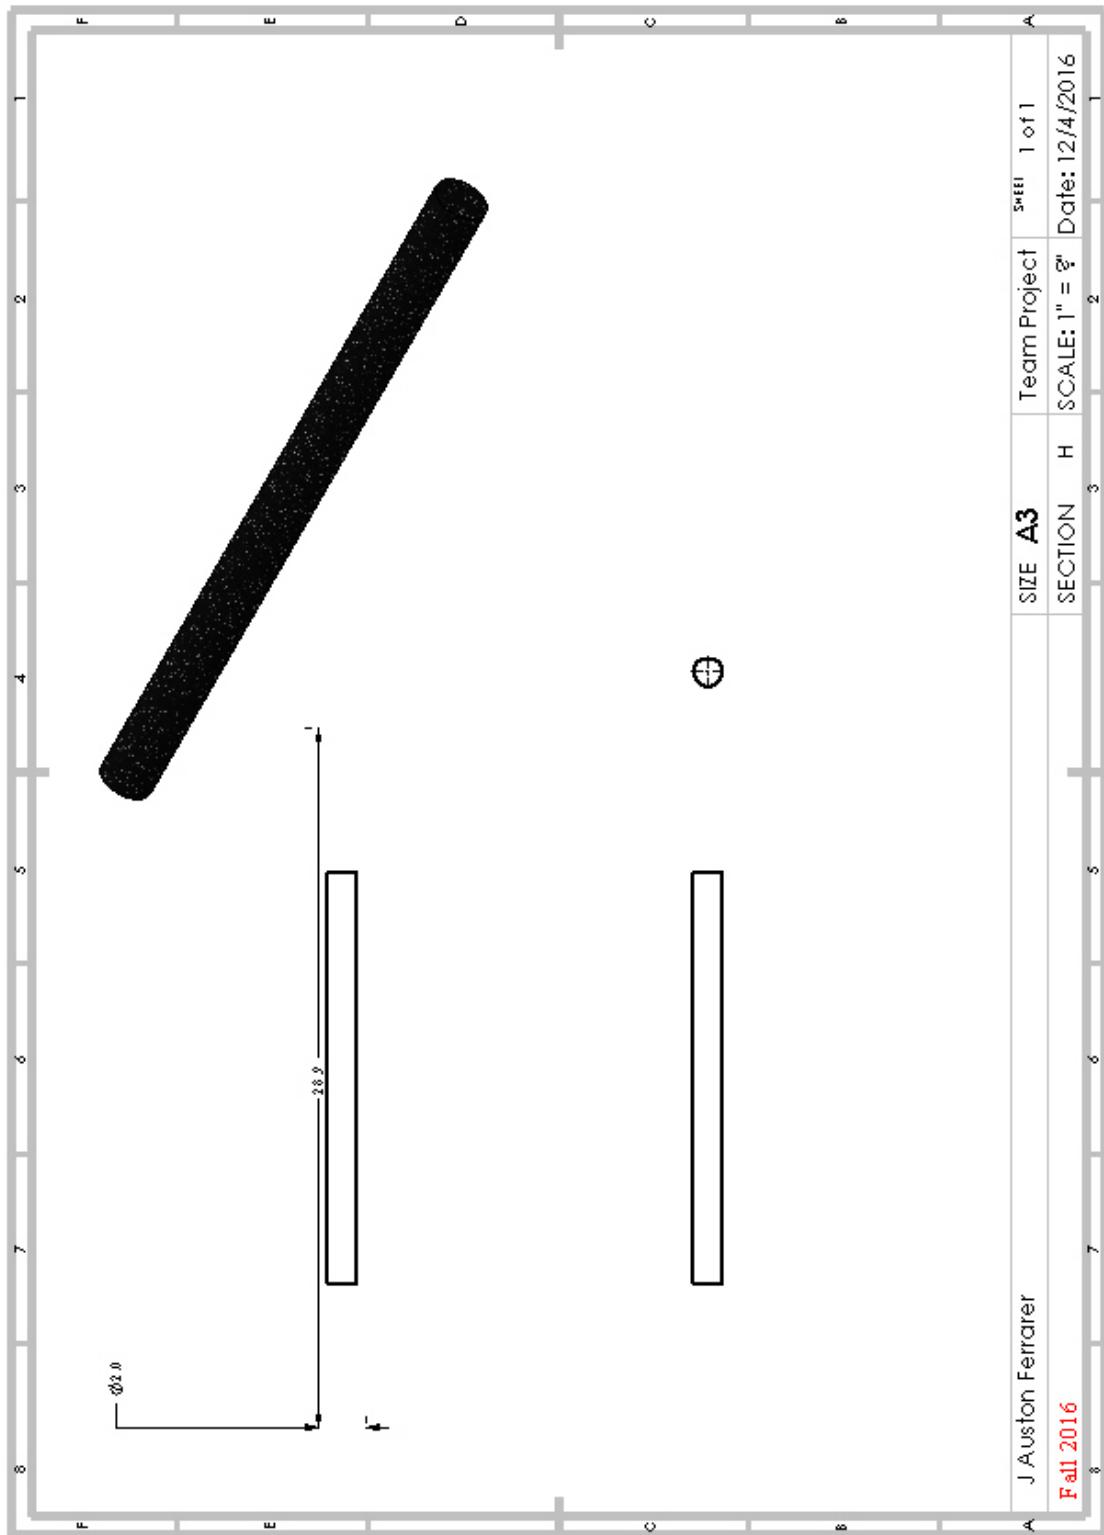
Ferrarer, Auston: Slide Bolt For Brackets
